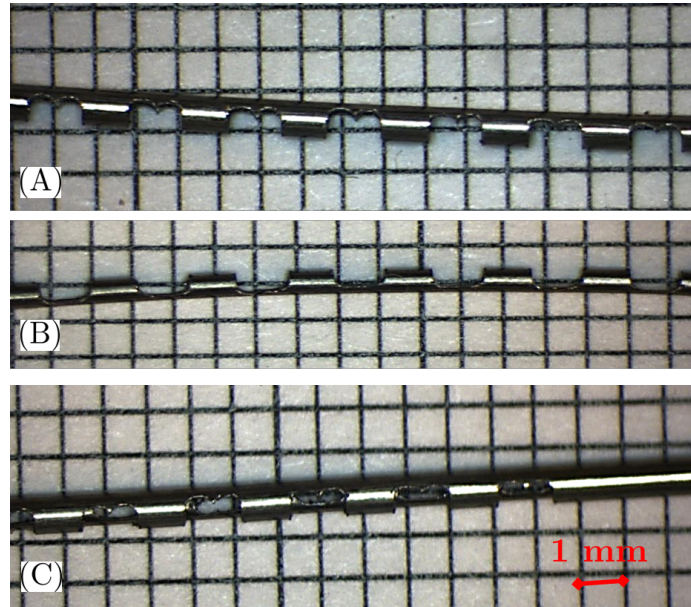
Machined and assembled nitinol tubes: A. Outer tube OD 0.88 mm - B.Inner tube OD 0.66 mm - C. Assembled APCR device
